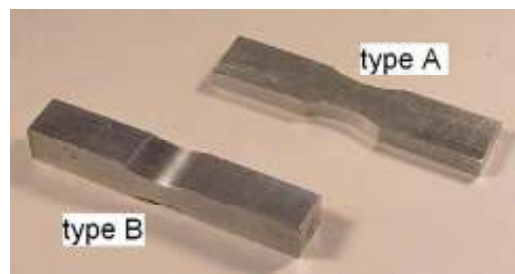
The typical shapes of fatigue test specimen. The type A was used for discussed experiments
